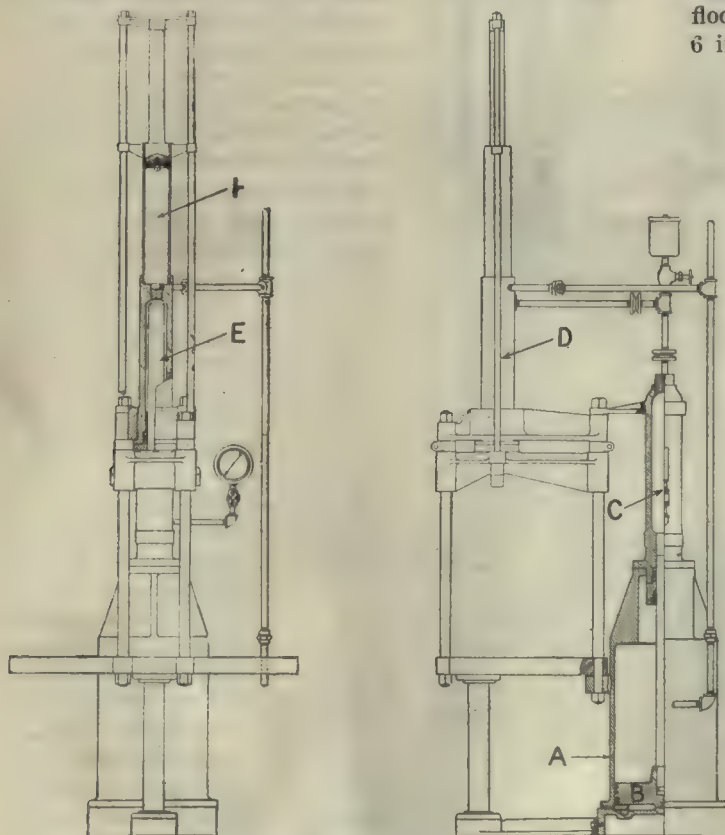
SECTIONAL VIEW SHOWING BROACHING PRESS CONSTRUCTION
